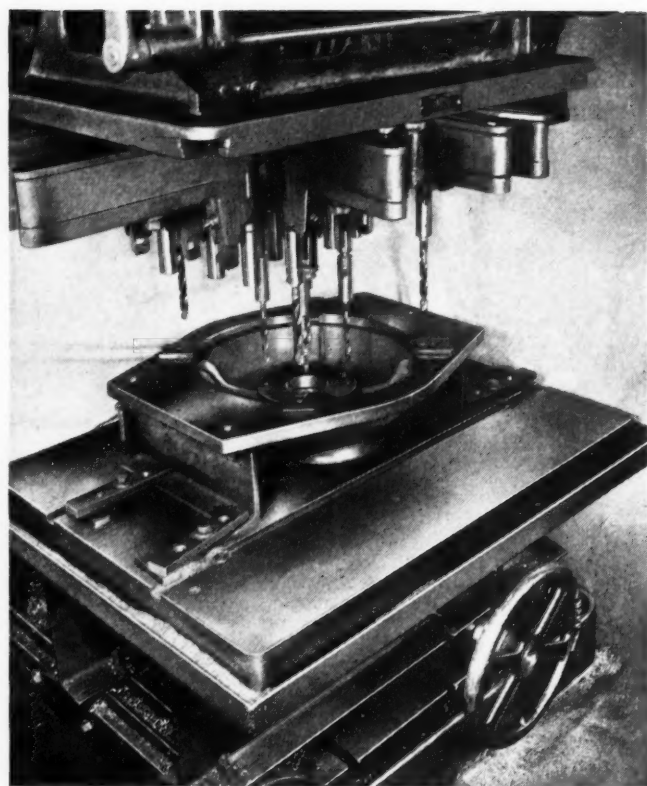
Built-in Jig Used with Multiple Drilling Head
